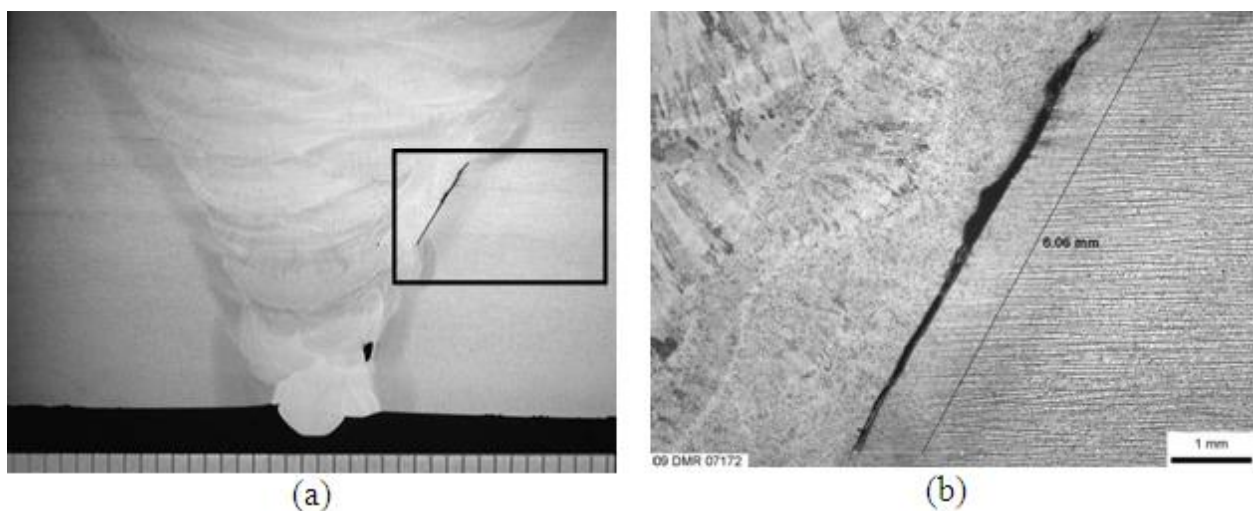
Lack of fusion seen in TIG welding samples [109]
